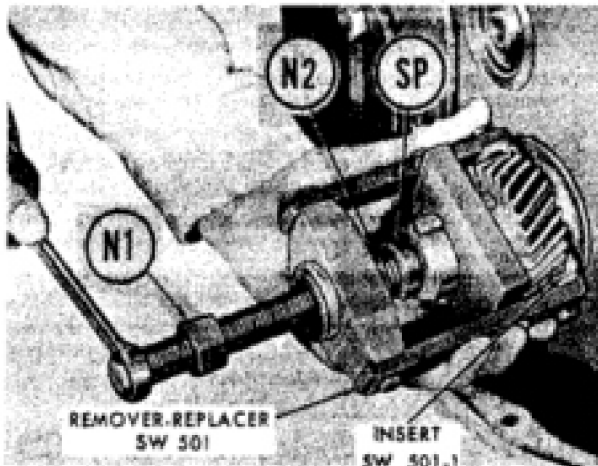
Using special remover-replacer (Nuday tool No. SWS01) to remove crankshaft gear. To install gear, nut (N2) and shaft protector (SP) are removed, threaded shaft is screwed into end of crankshaft and nut (N1) is turned to push gear onto shaft.
